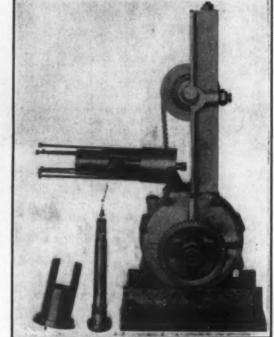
Motor With Half of Cylinder and Rotary Valve Removed
